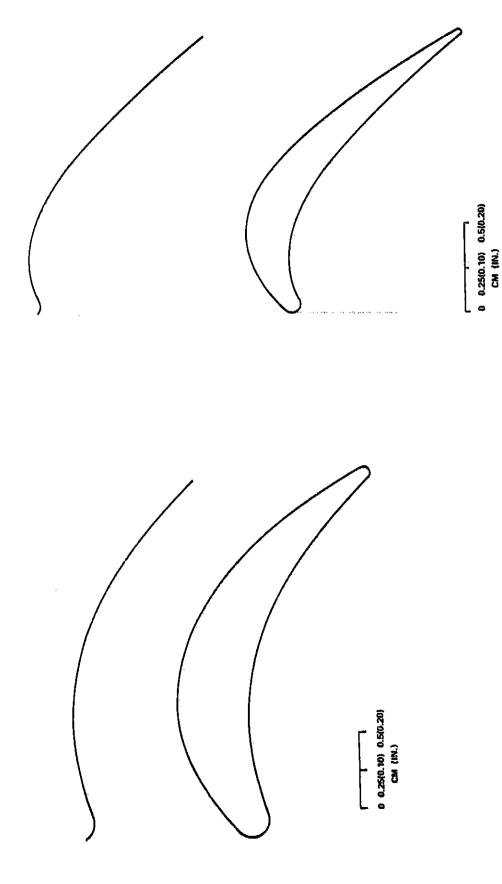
Rotor Tip Section [R = 14.16 cm (5.57 in)] Cylindrical Cut
